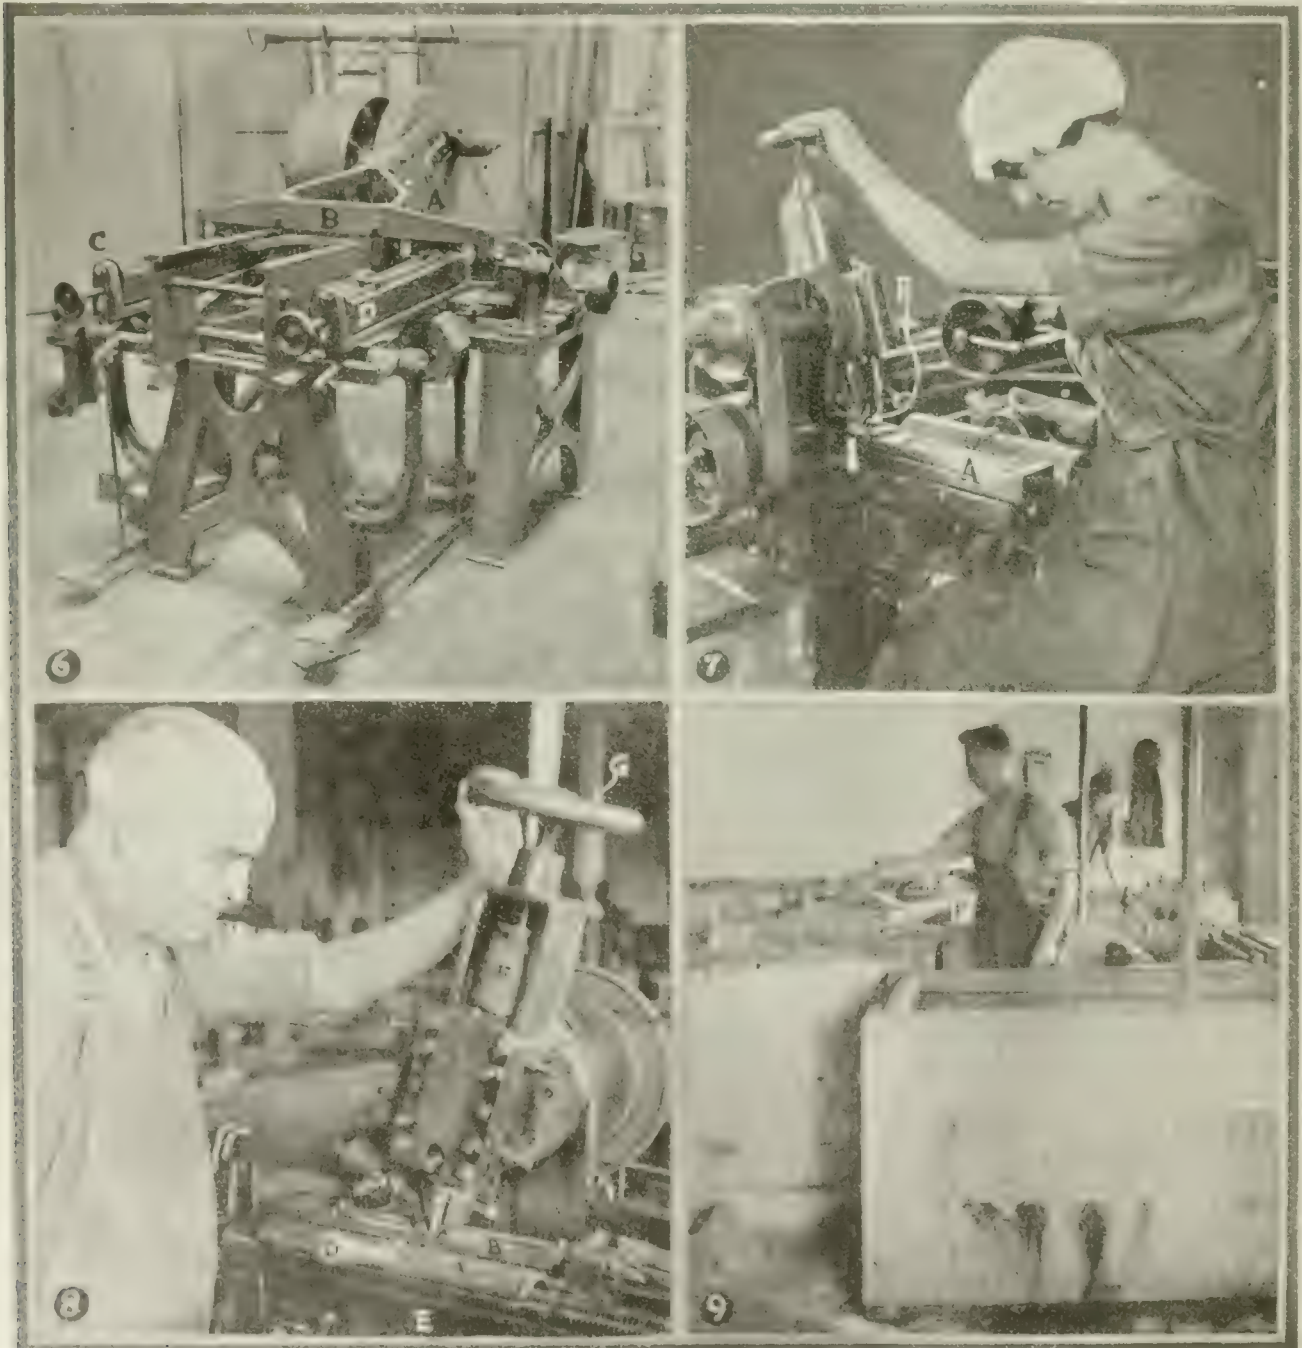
A STRIPPING MACHINE ALMOST COMPLETED.
